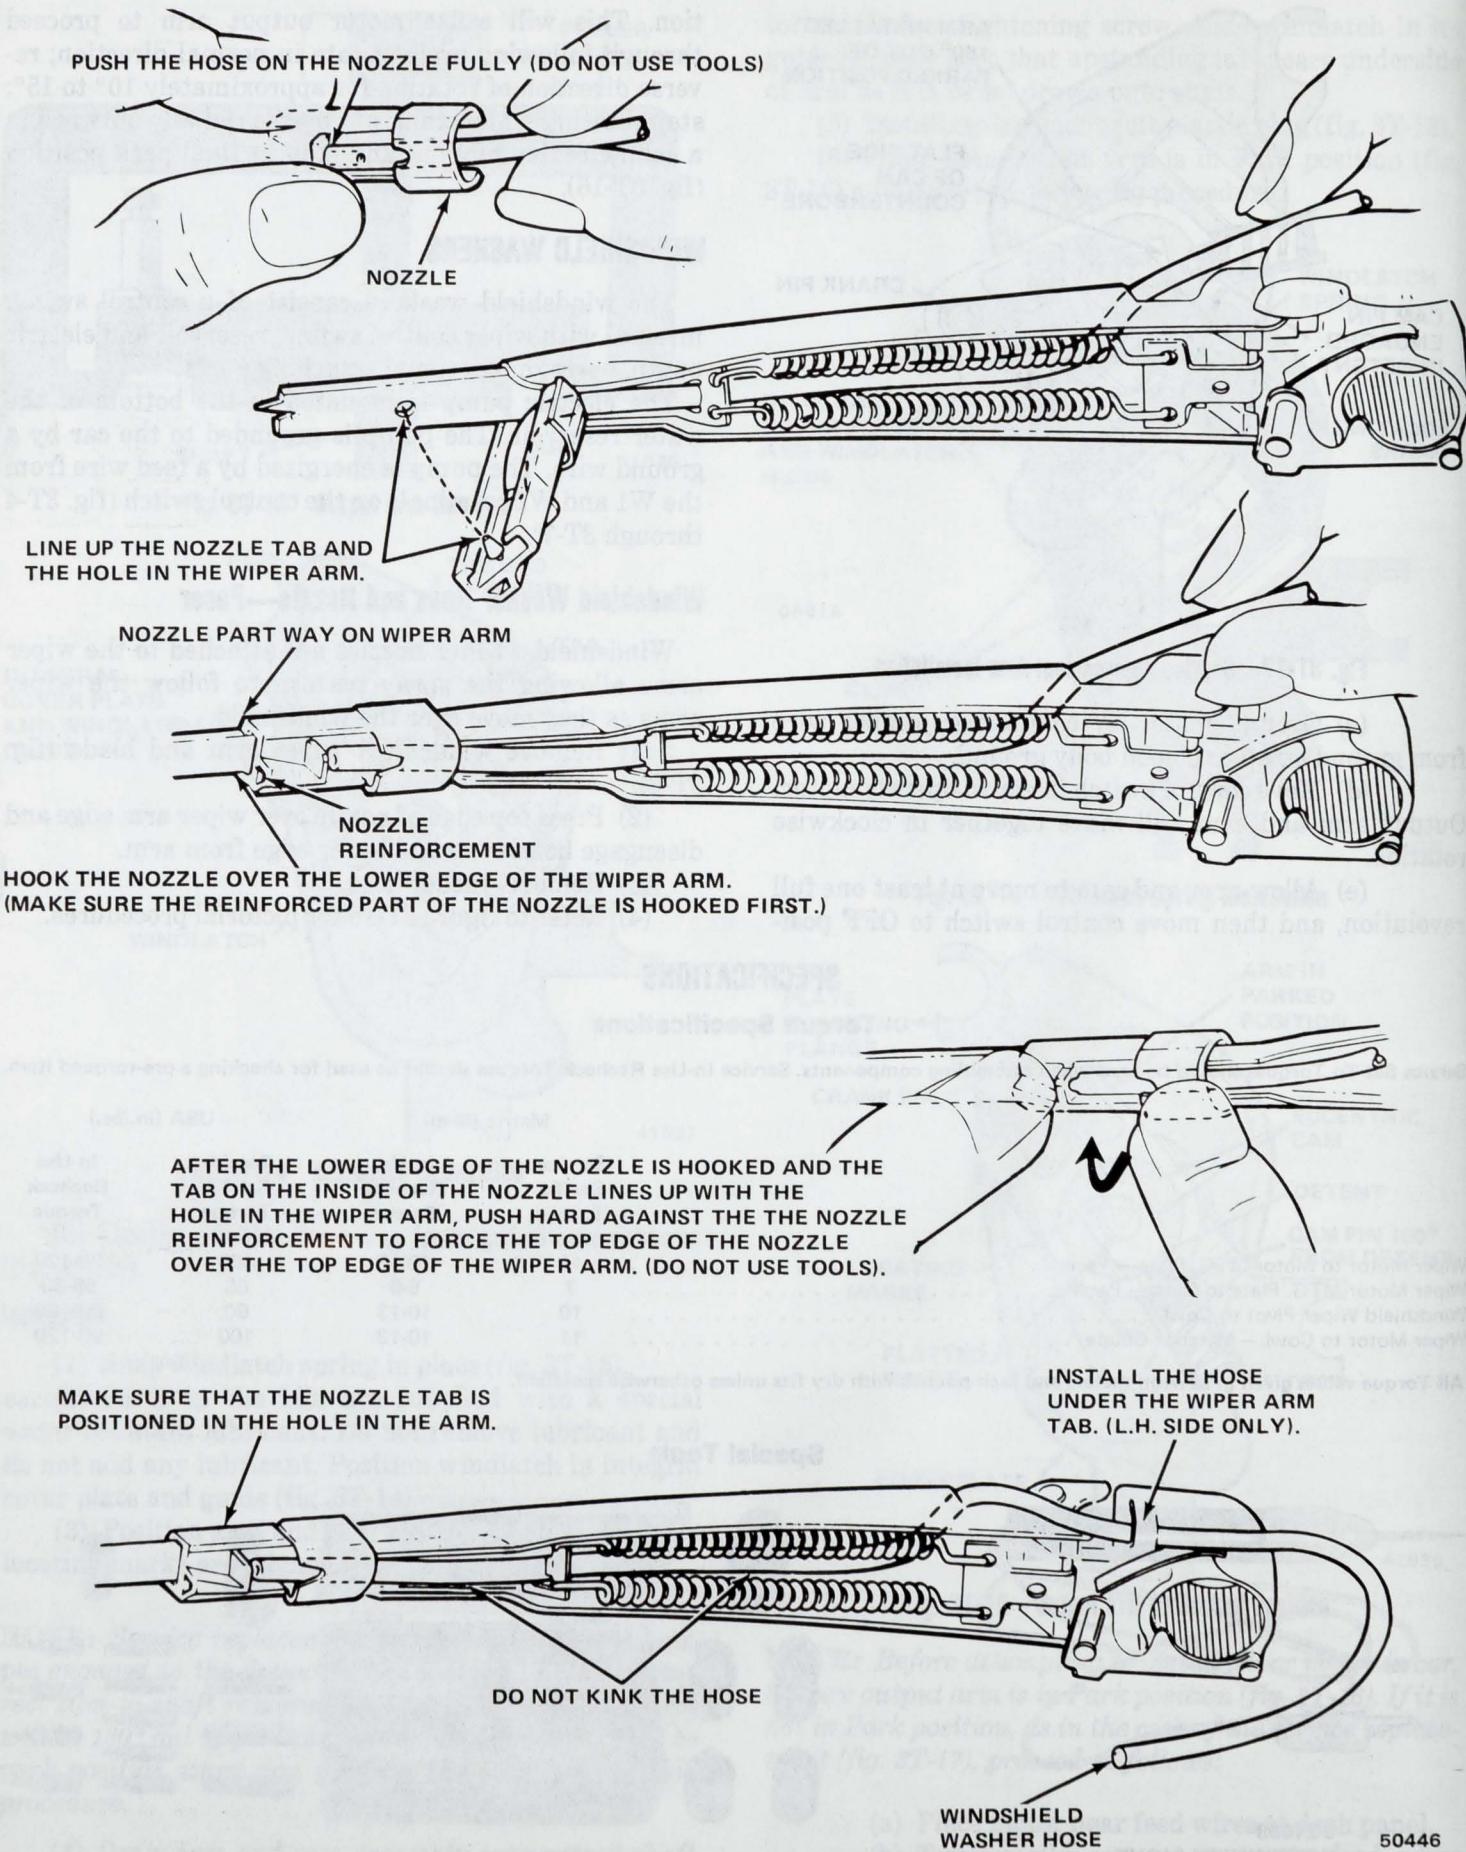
T-18 Windshield Washer Hose and Nozzle Assembly—Pacer
